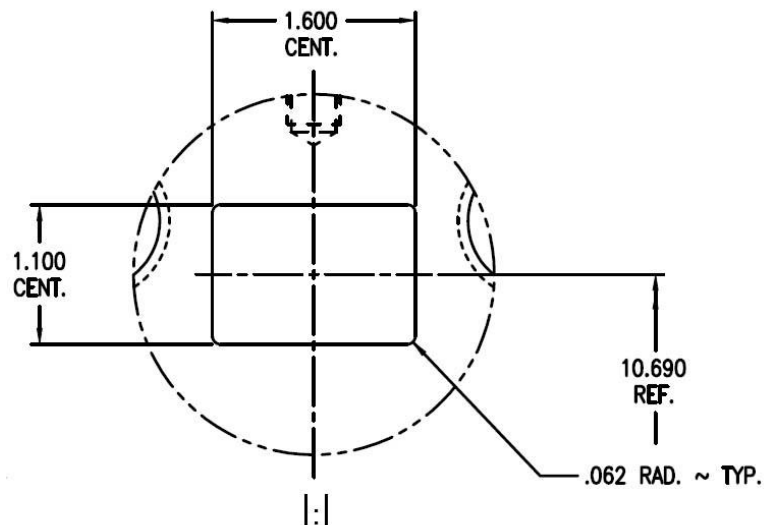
Slot machined at top center of adapter flange and upstream flange of new sting-support section. Dimensions in inches. [18]
